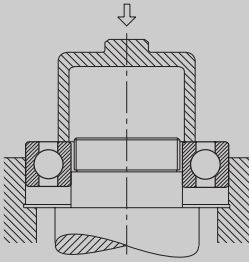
Pressing of a Bearing when Tight-Fitting a Inner Ring
